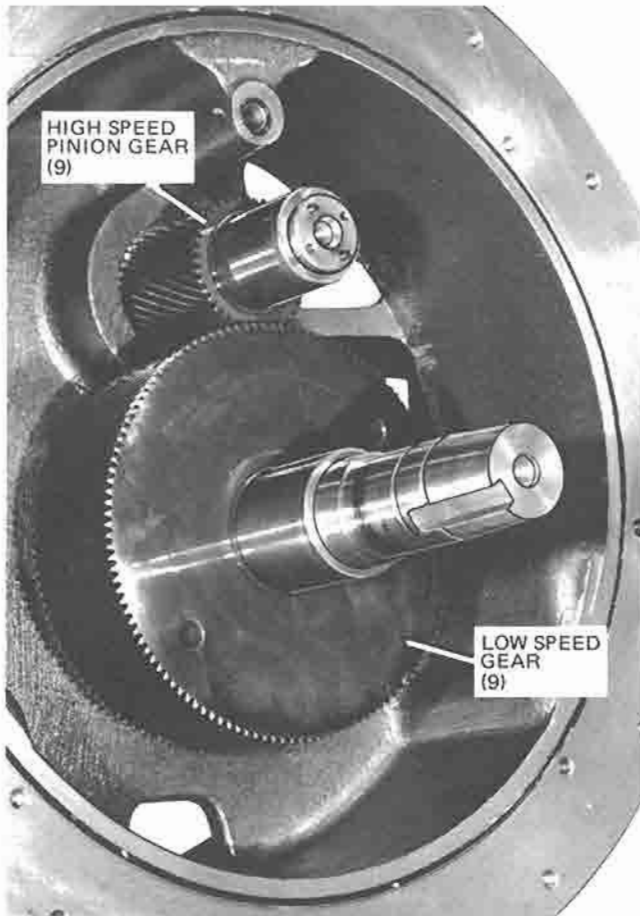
HIGH SPEED PINION GEAR (UPPER) AND LOW SPEED GEAR (LOWER)
